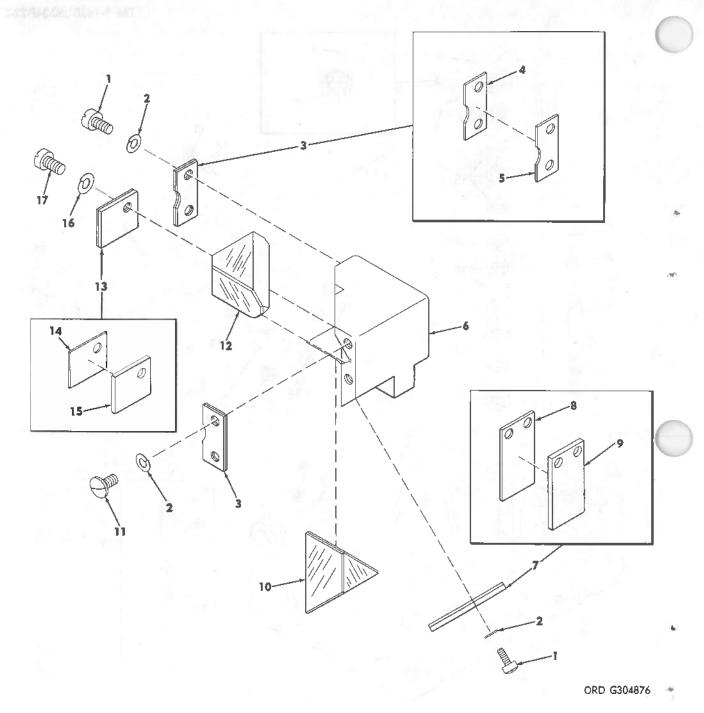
LEVEL. PRECISION, MASTER SUBASSEMBLY /8172012/-PARTIAL EXPLODED VIEW
